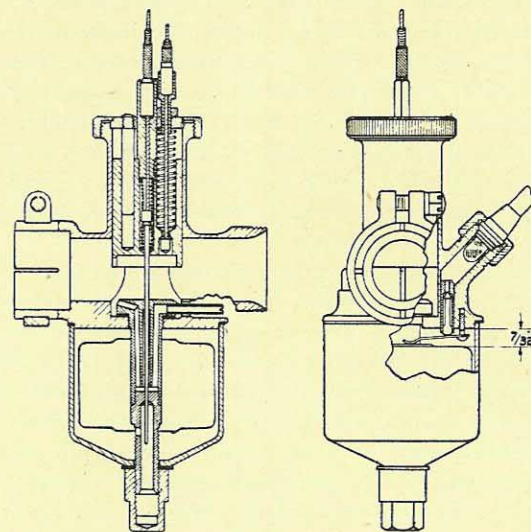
SECTIONAL ARRANGEMENTS OF TWO-LEVER CARBURETTER.
